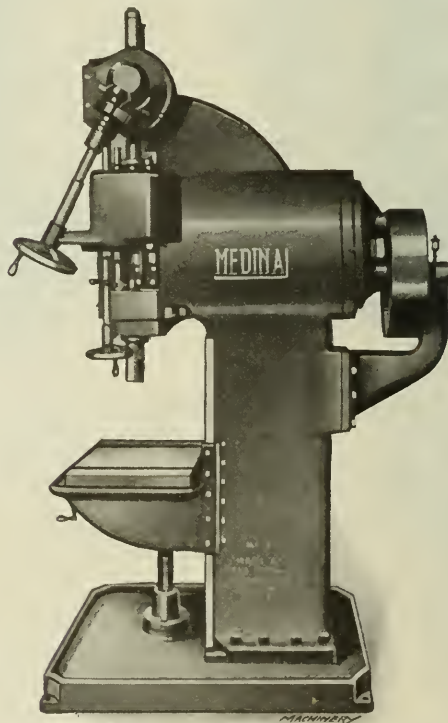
Medina Heavy-duty Drilling and Boring Machine
